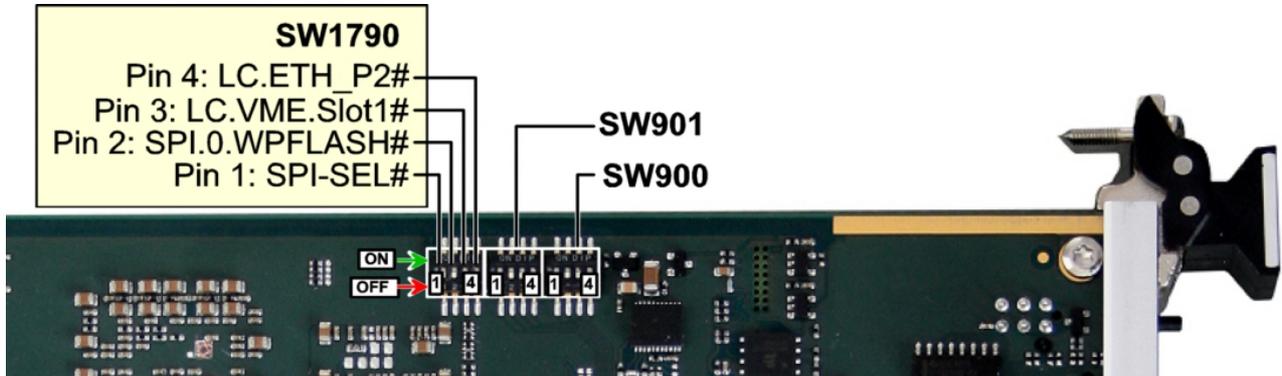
Coding switches on the PCB bottom layer (cut-out)
